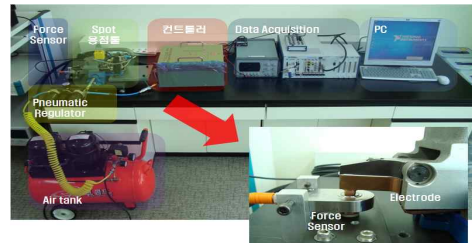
Measurement System for Inverter Type Spot Welding Tool
